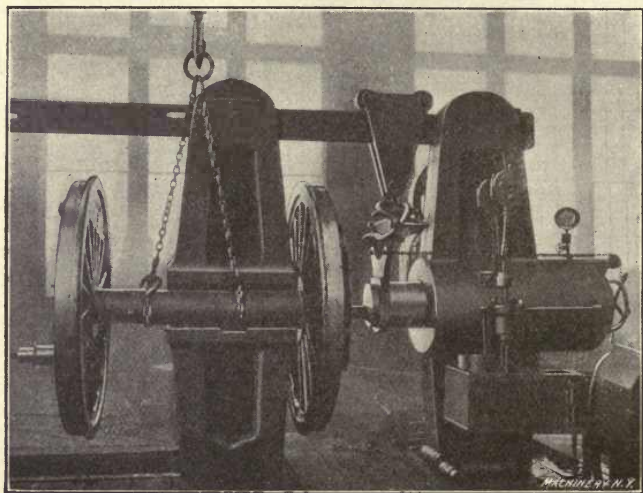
Forcing a Crankpin into a Wheel Center by a Hydraulic Press
